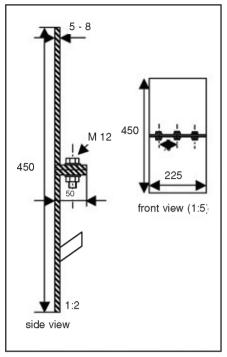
Specimen design for splash zone (SZ); dimensions in mm Courtesy of the authors
